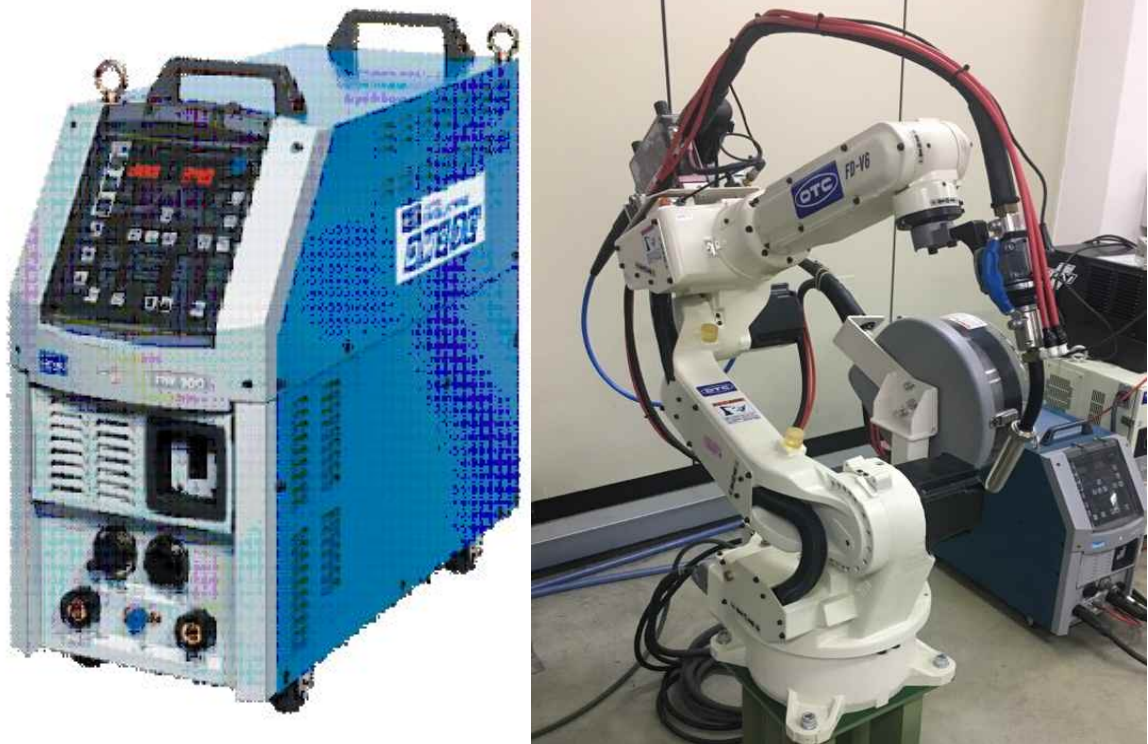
AC pulse MIG Welding Machine and 6 Axis Welding Robot
